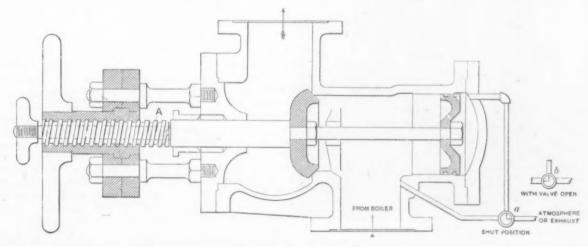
Latest Form of Steam Closing Stop Valve.
